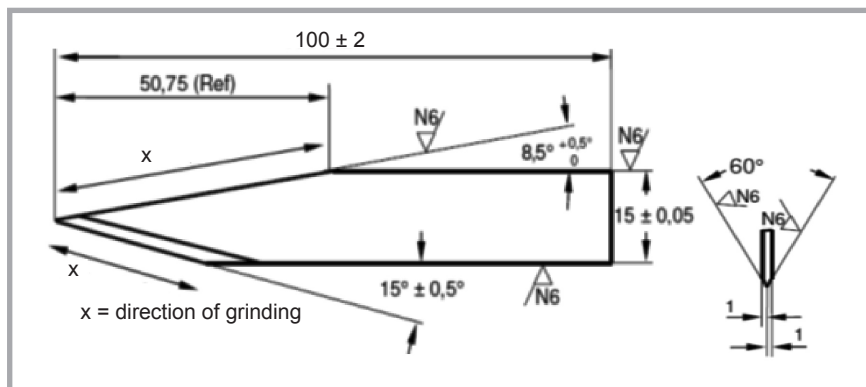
Geometry of test blade P1/B (dimensions in mm) [42].
